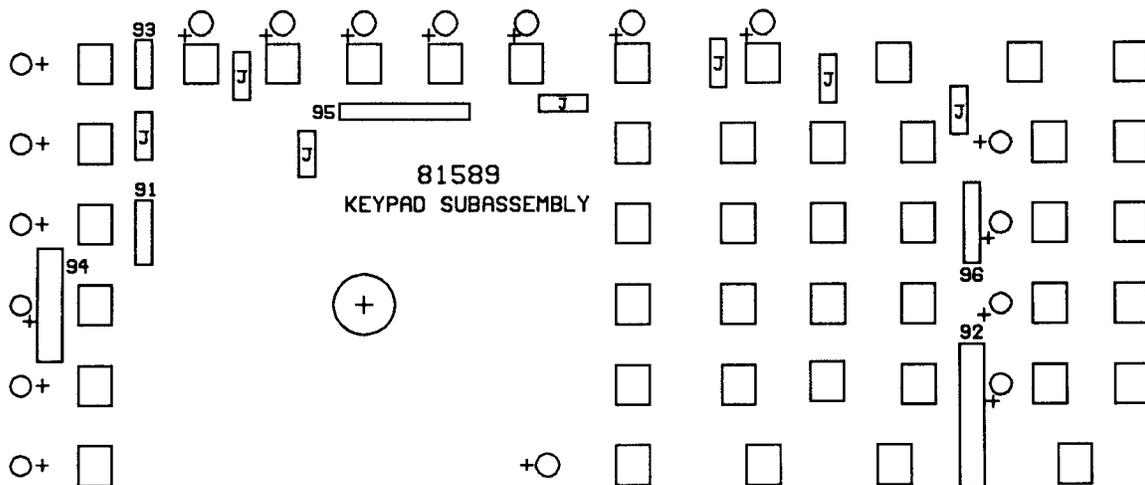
KEYPAD/ENCODER BOARD COMPONENT LAYOUT (81589)
